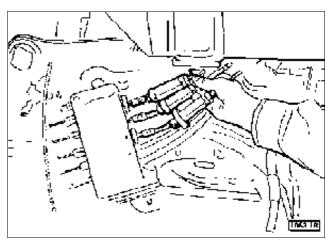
Connecting the auxiliary spool valve bowden cables before refitting the cab to the tractor.
